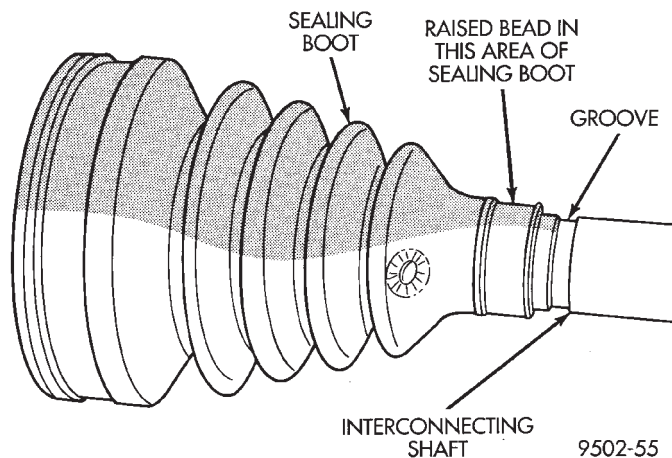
Sealing Boot Installation on Interconnecting Shaft
